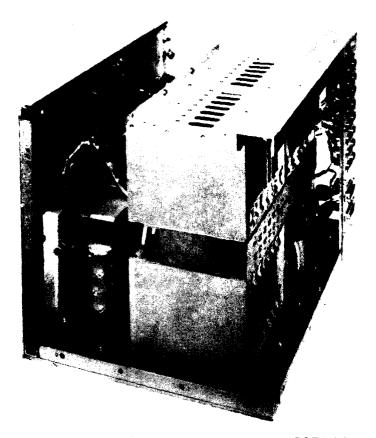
MADAR SHOWING CONSTRUCTION DETAILS
